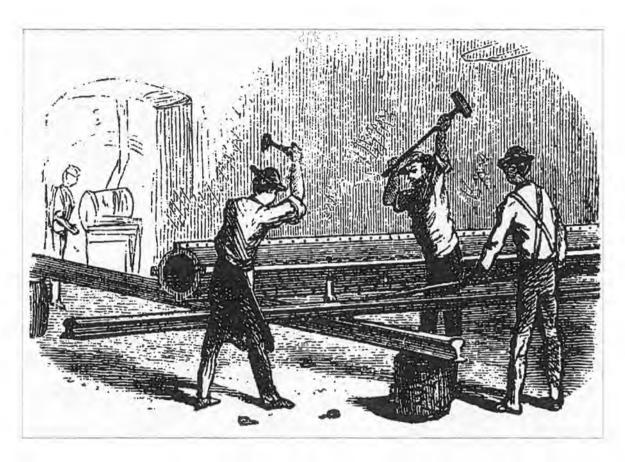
Shop riveting a column, c. 1872. (Source: Victor C. Darnell, <u>Directory of American Bridge-Building Companies</u>, Washington, D.C., 1984, p. 47).
